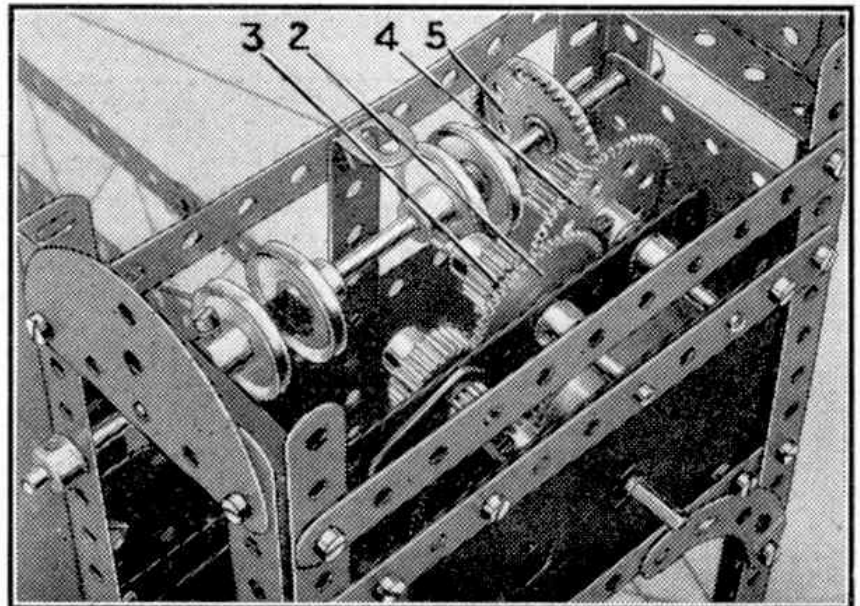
This illustration shows the assembly of the gearing and position of the driving Motor in the beam bridge.
